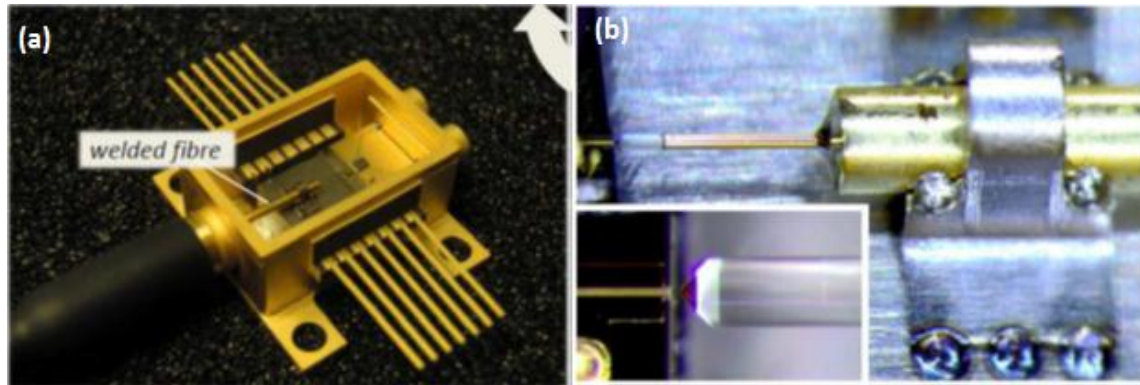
Example of edge-coupling technique for photonic packaging; (a) butterfly package; (b) Microscope image of a lensed-fiber in a metal ferrule, laser-welded into perfect position [20].
